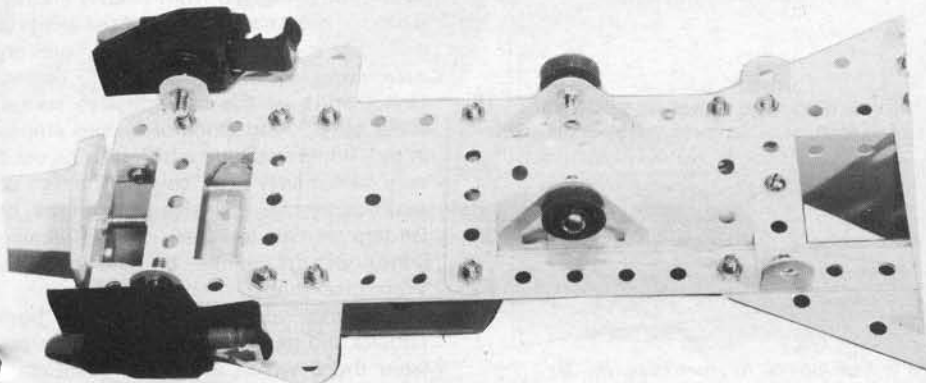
Underbelly view of Protector, showing reinforcement in construction by use of  $2\frac{1}{2}$  in. strips.
